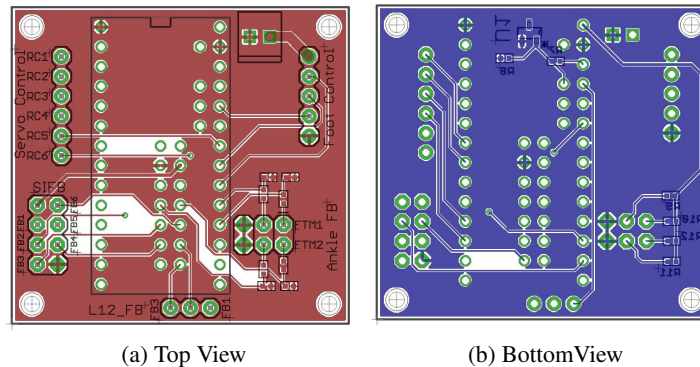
Top (a) and Bottom (b) view of the carrier board
